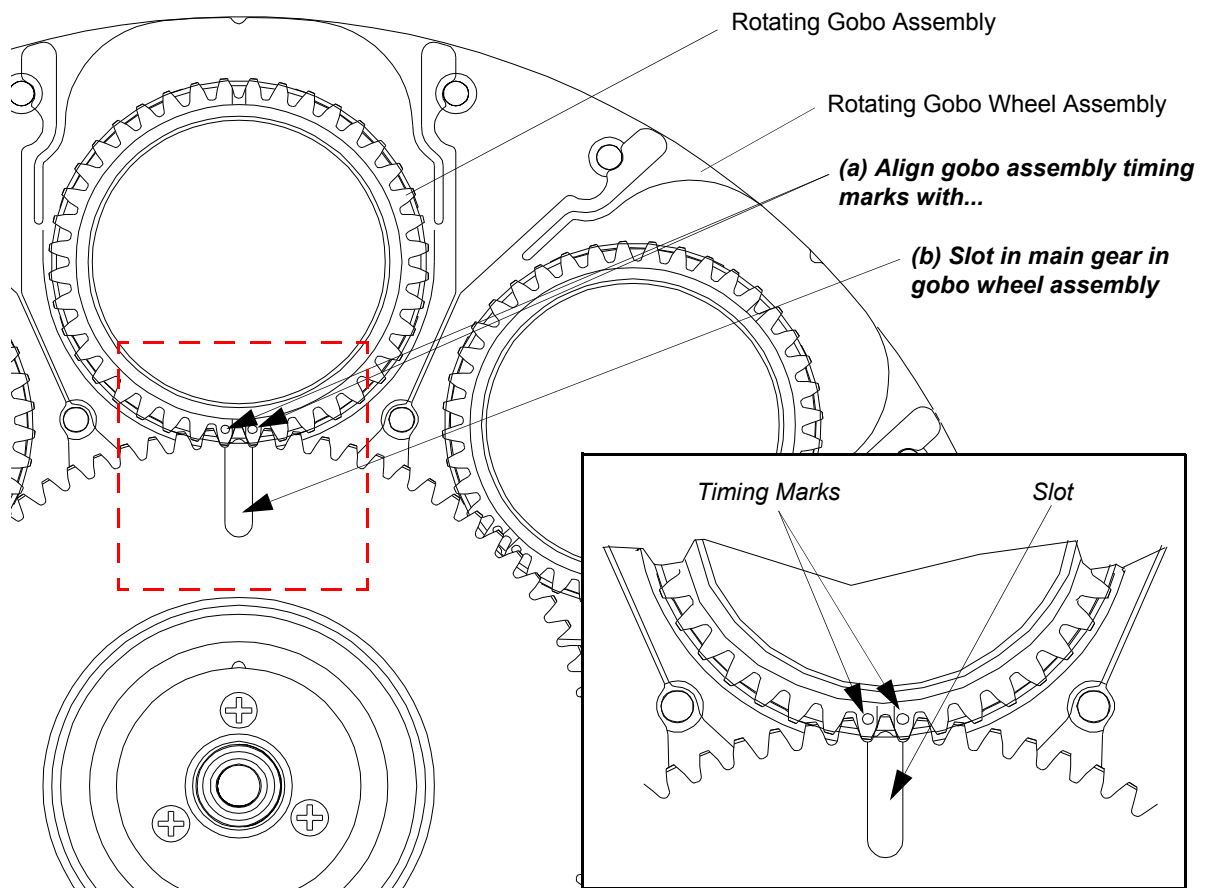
Rotating Gobo Wheel - Gobo Clocking
